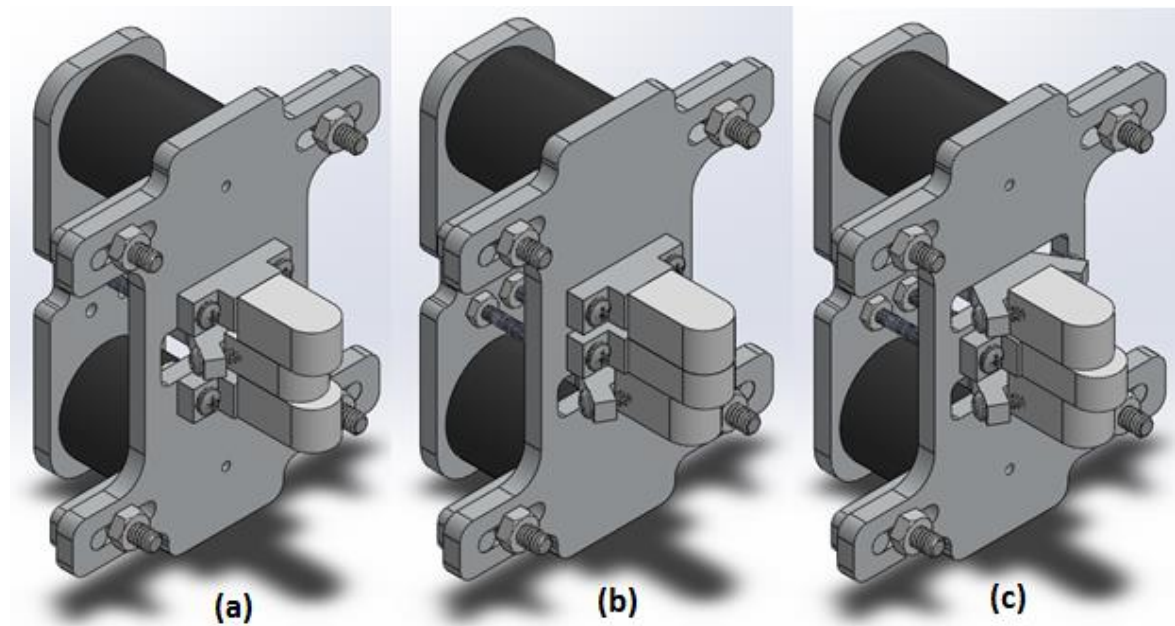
Isometric Views of the Spondylolisthesis Test Fixtures: Part (a) is the anterior standard three point bending fixture, part (b) is the anterior terminal three point bending fixture, and part (c) is the posterior standard three point bending fixture. Note: in the actual model, washers will be implemented where nuts are used and there are no holes in the front plates (they were just there for ease of Solidworks assembly).
